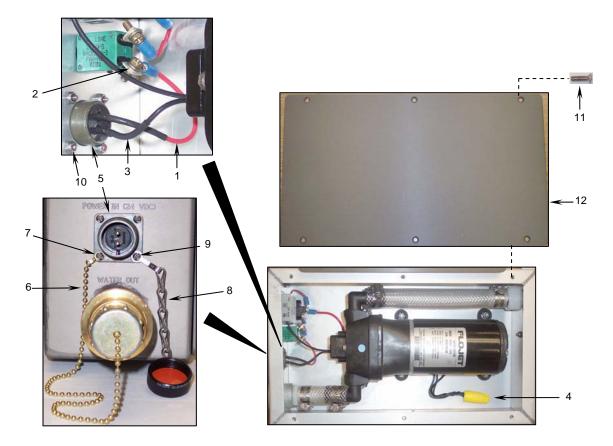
Installing the Sink Fill Pump Assembly Electrical Connector.
